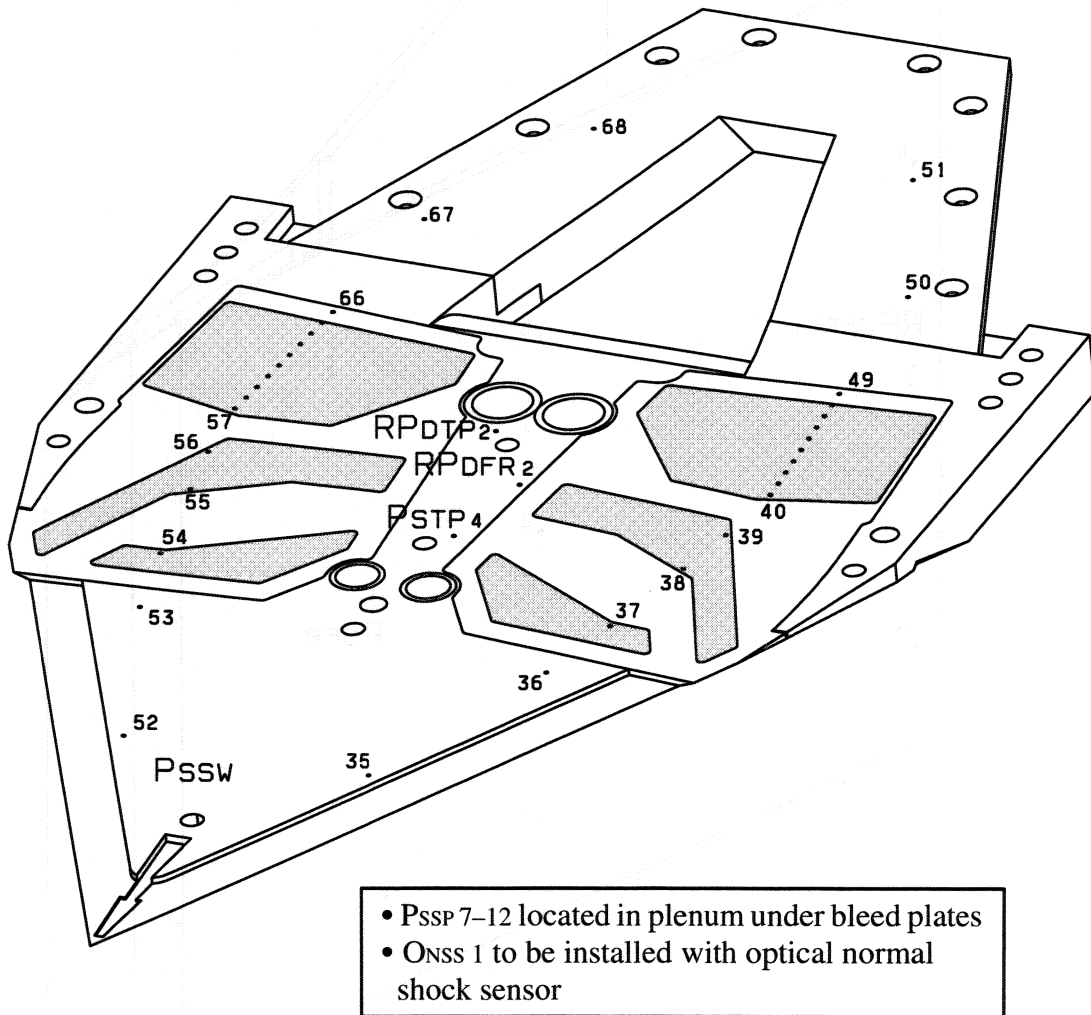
Sidewall Assembly Instrumentation (lower)
